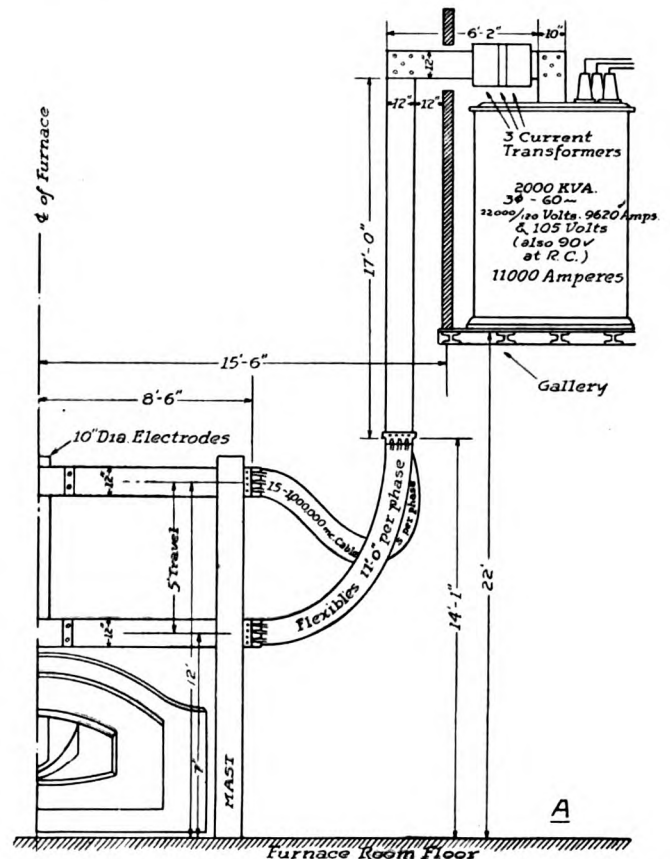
Sketch "A", showing distance transformer is placed from furnace.
